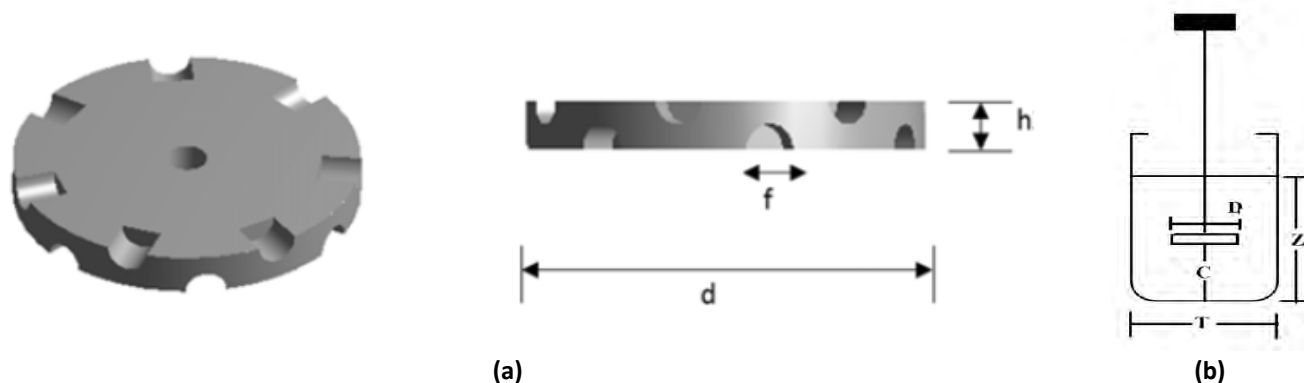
(a) Geometry impeller, (b) Geometry reactor
